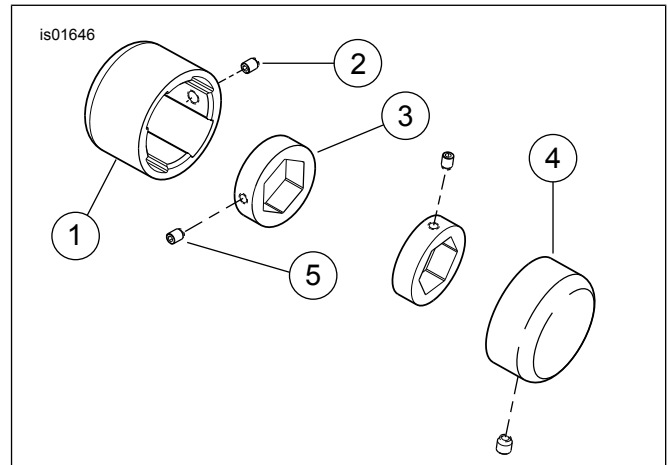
Service Parts: Dyna Rear Axle-Nut Cover Kit
